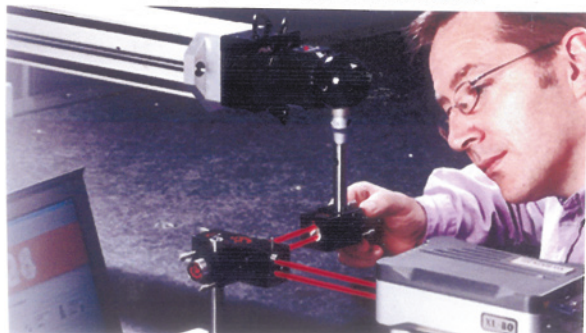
Typical laser mounting configurations, prior to machine tool and CMM calibration trails (courtesy of Renishaw plc)
